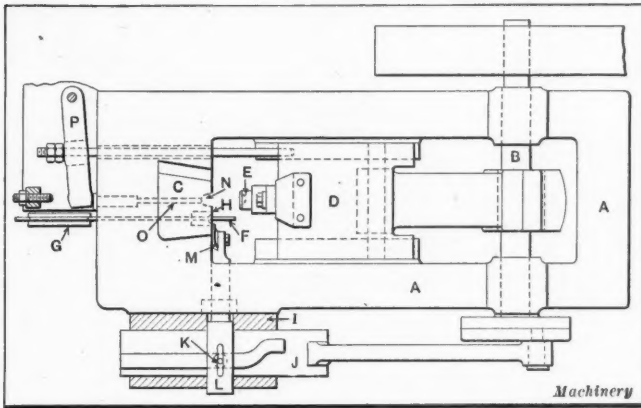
Plan View of Cold-header Mechanism, illustrating Method of Operation
